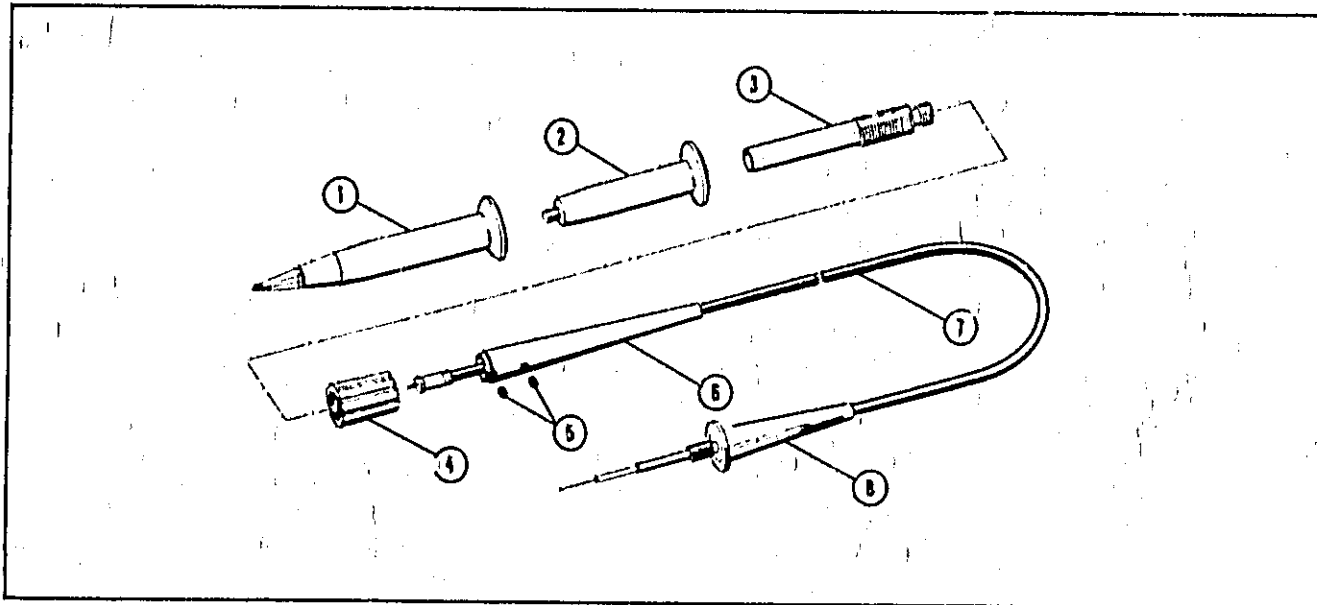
Voltage Probe Assembly, -hp- Part No.'s 412A-21A and 412A-21D,
